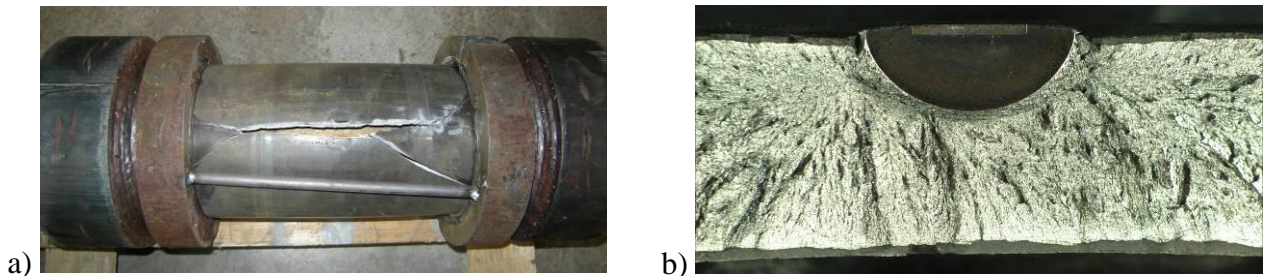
Burst test of the specimen #5: a) longitudinal fracture at the end of the test; b) fractography of the broken piece.
